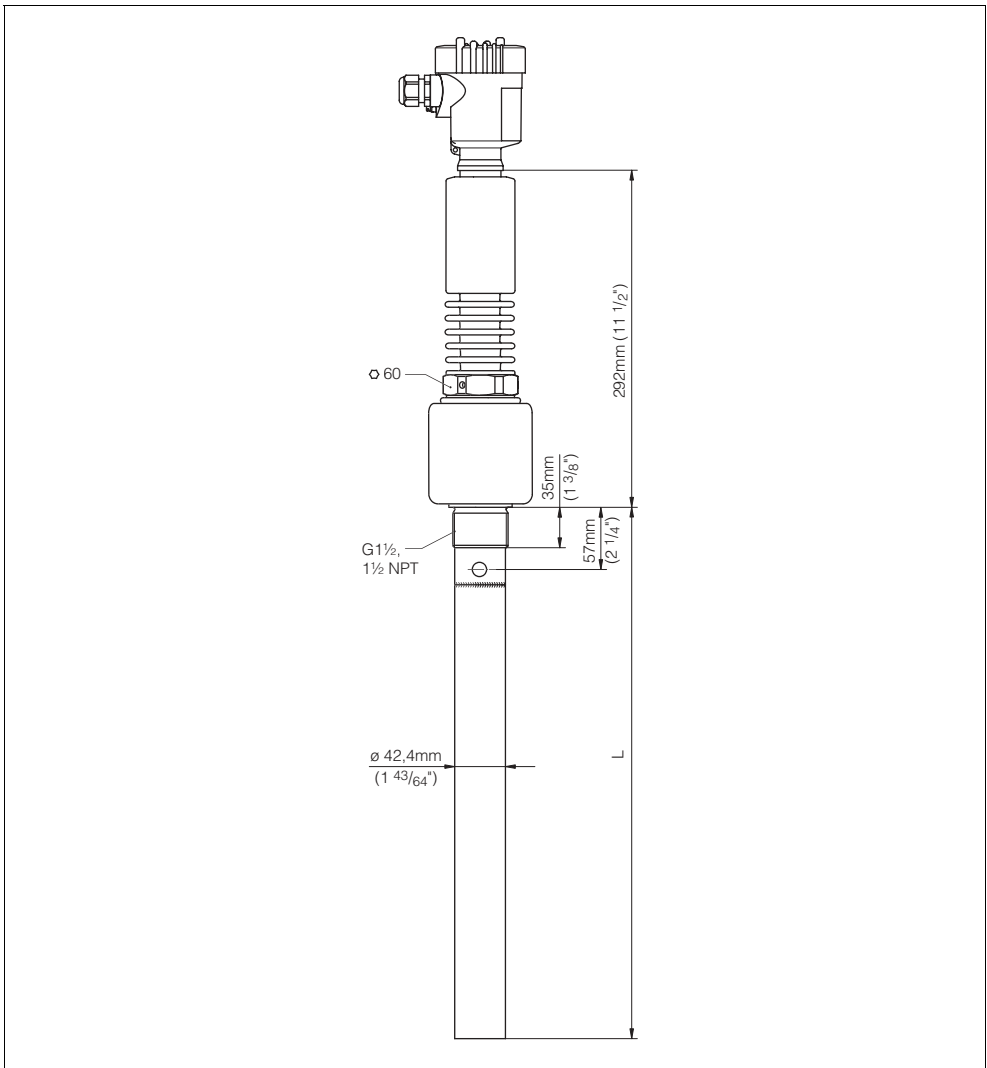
KSR-GT 666 (-200° ... +400°C) - coax version with thread
